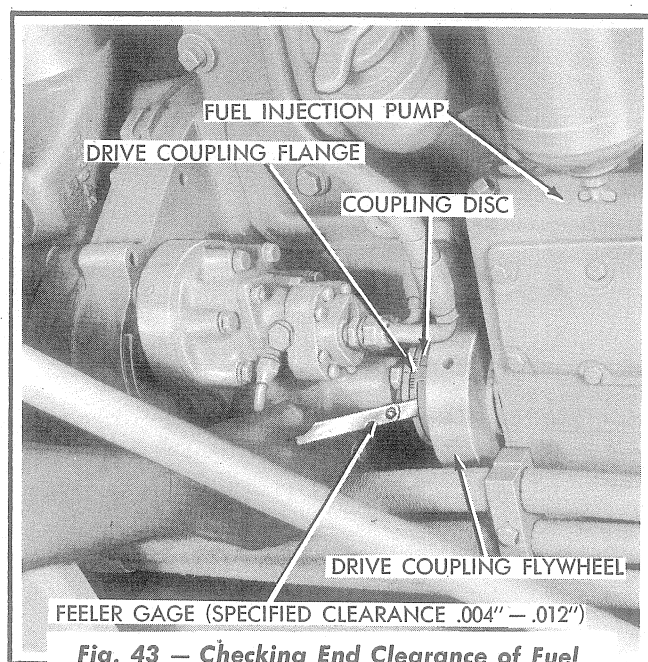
Checking End Clearance of Fuel Injection Pump Drive Coupling (Tractors Serial No. 4001 and Above)
